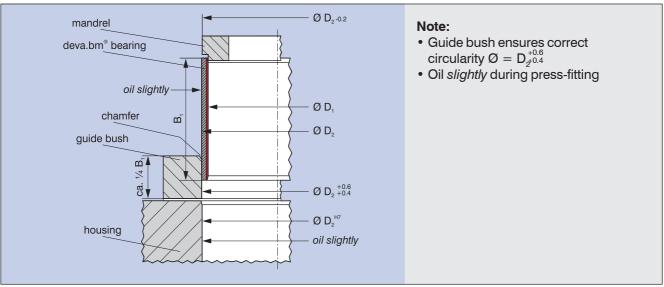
Press-fitting of large deva.bm® bearings
